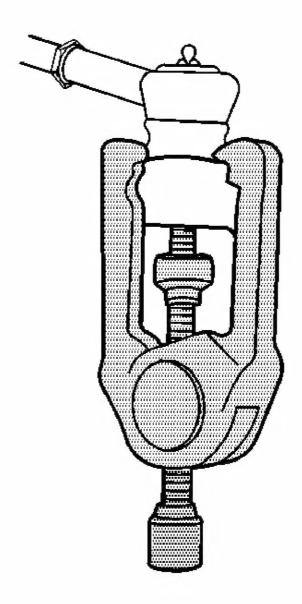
Removing Outer Tie Rod Assembly From Steering Knuckle Courtesy of GENERAL MOTORS CORP.
